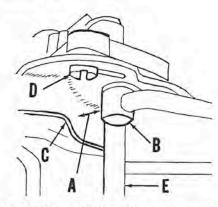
A — Synchronizing cam adjustment on 2 cylinder Merc 350. Distance A should measure 9/32-inch. Refer to Text.
